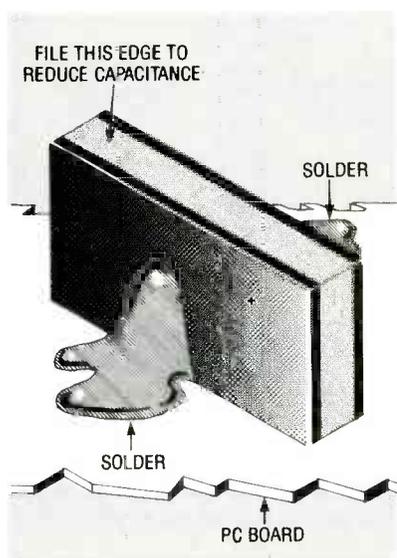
TO MAKE C10, take a small square of G-10, 0.062-inch PC board material and trim it to a 3/16-inch square. Install it on the solder side of the board in the location shown in Fig. 6.
